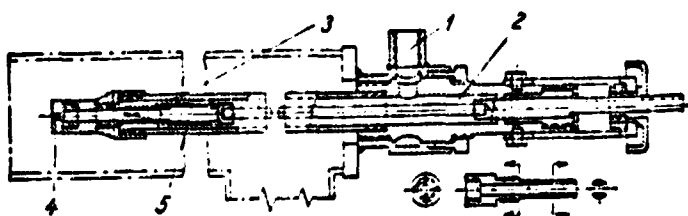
Fuel oil spray nozzle 4 rotary furnaces (design of "Giprotsement" institute).
